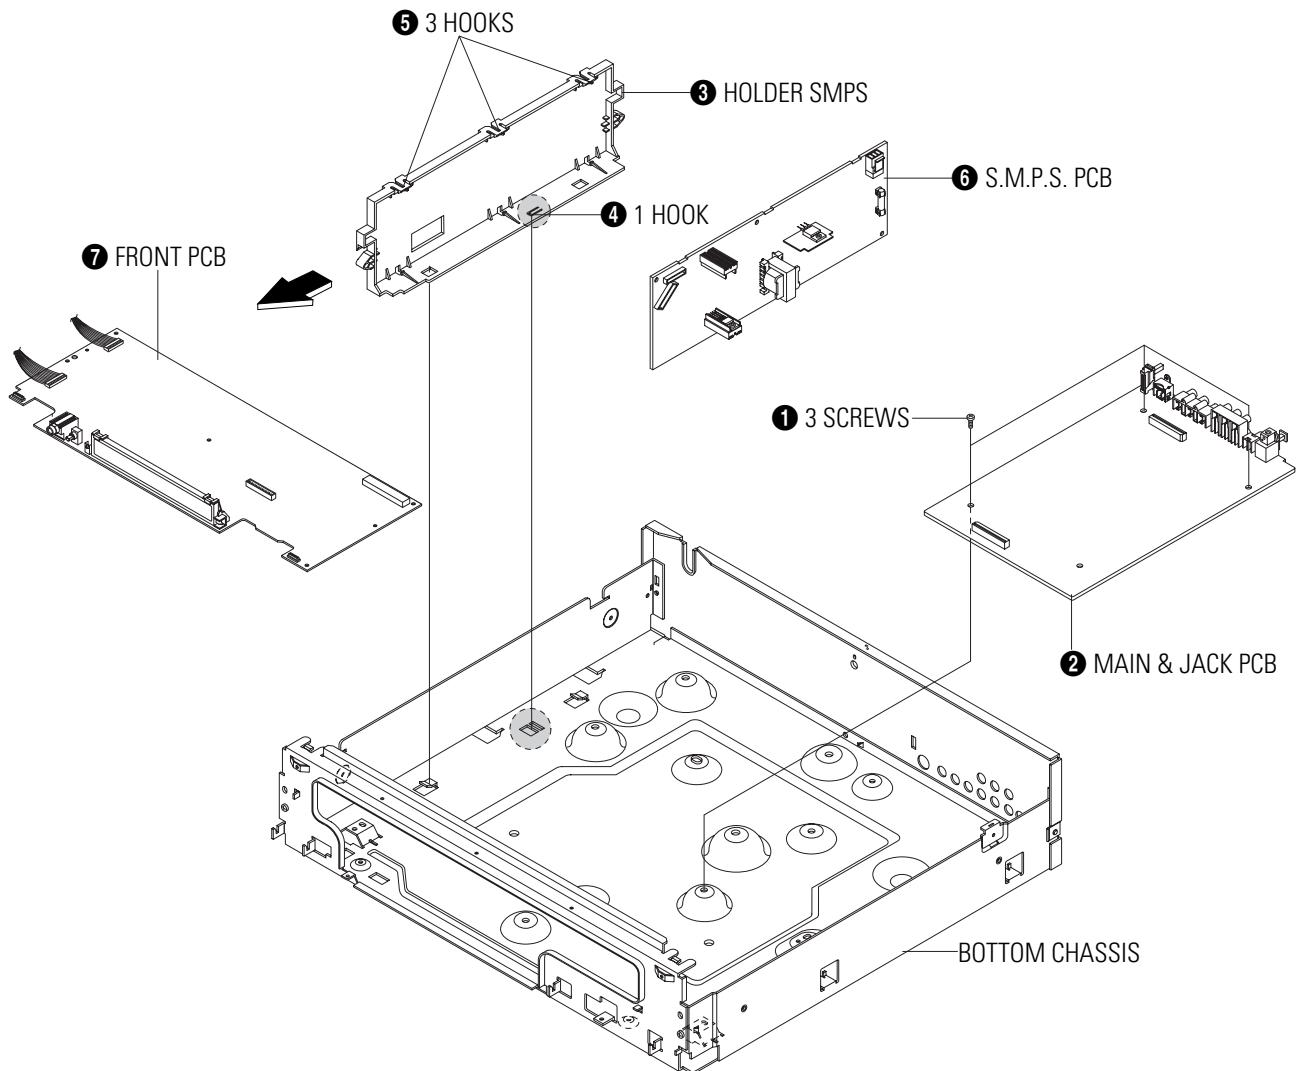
Main & Jack PCB, S.M.P.S. PCB, Front PCB Removal
